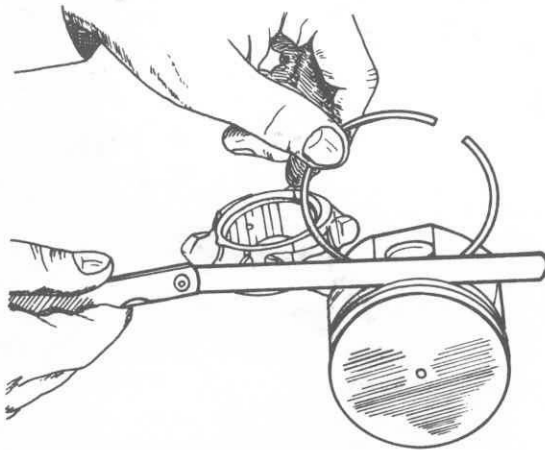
17 Using feeler gauges to measure side clearance of rings in piston grooves
